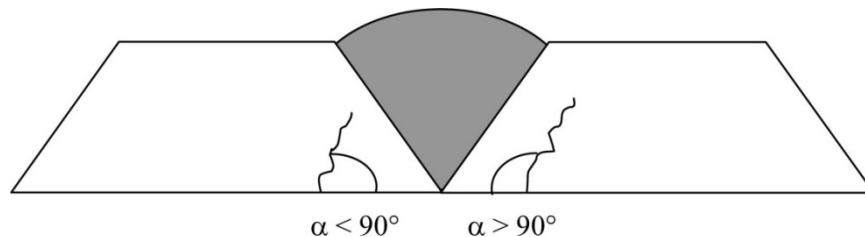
Definition of Angles when the Crack is Located Close to a Weld (Wåle 2006); reprinted with permission
